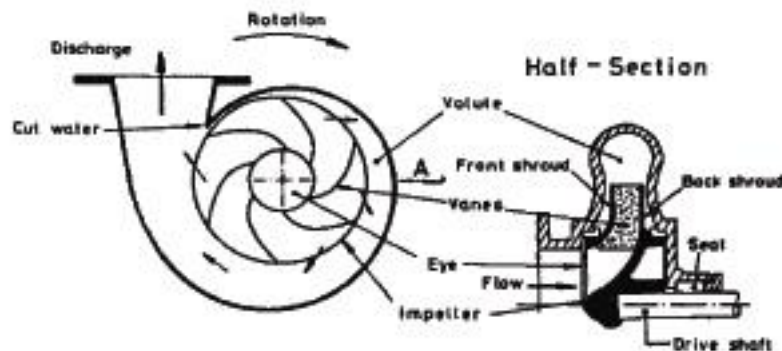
Sectional view of the basic construction of a centrifugal pump [5]
